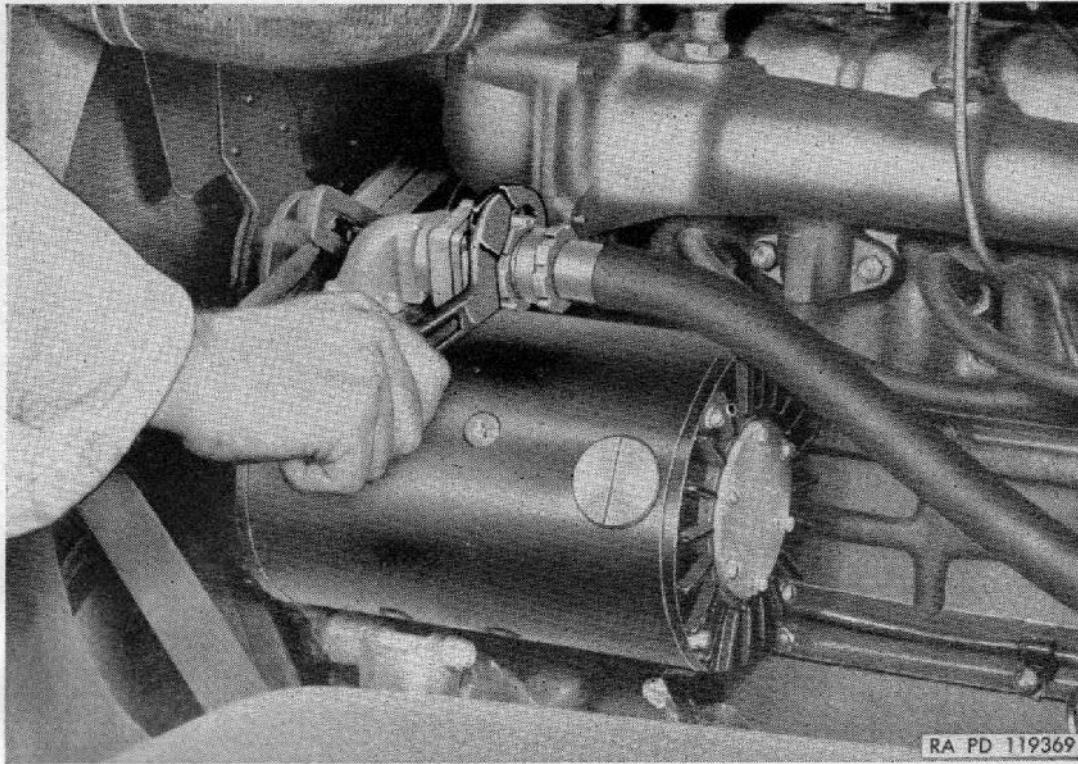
Disconnecting generator harness using wrench 41-W-3249-900.
